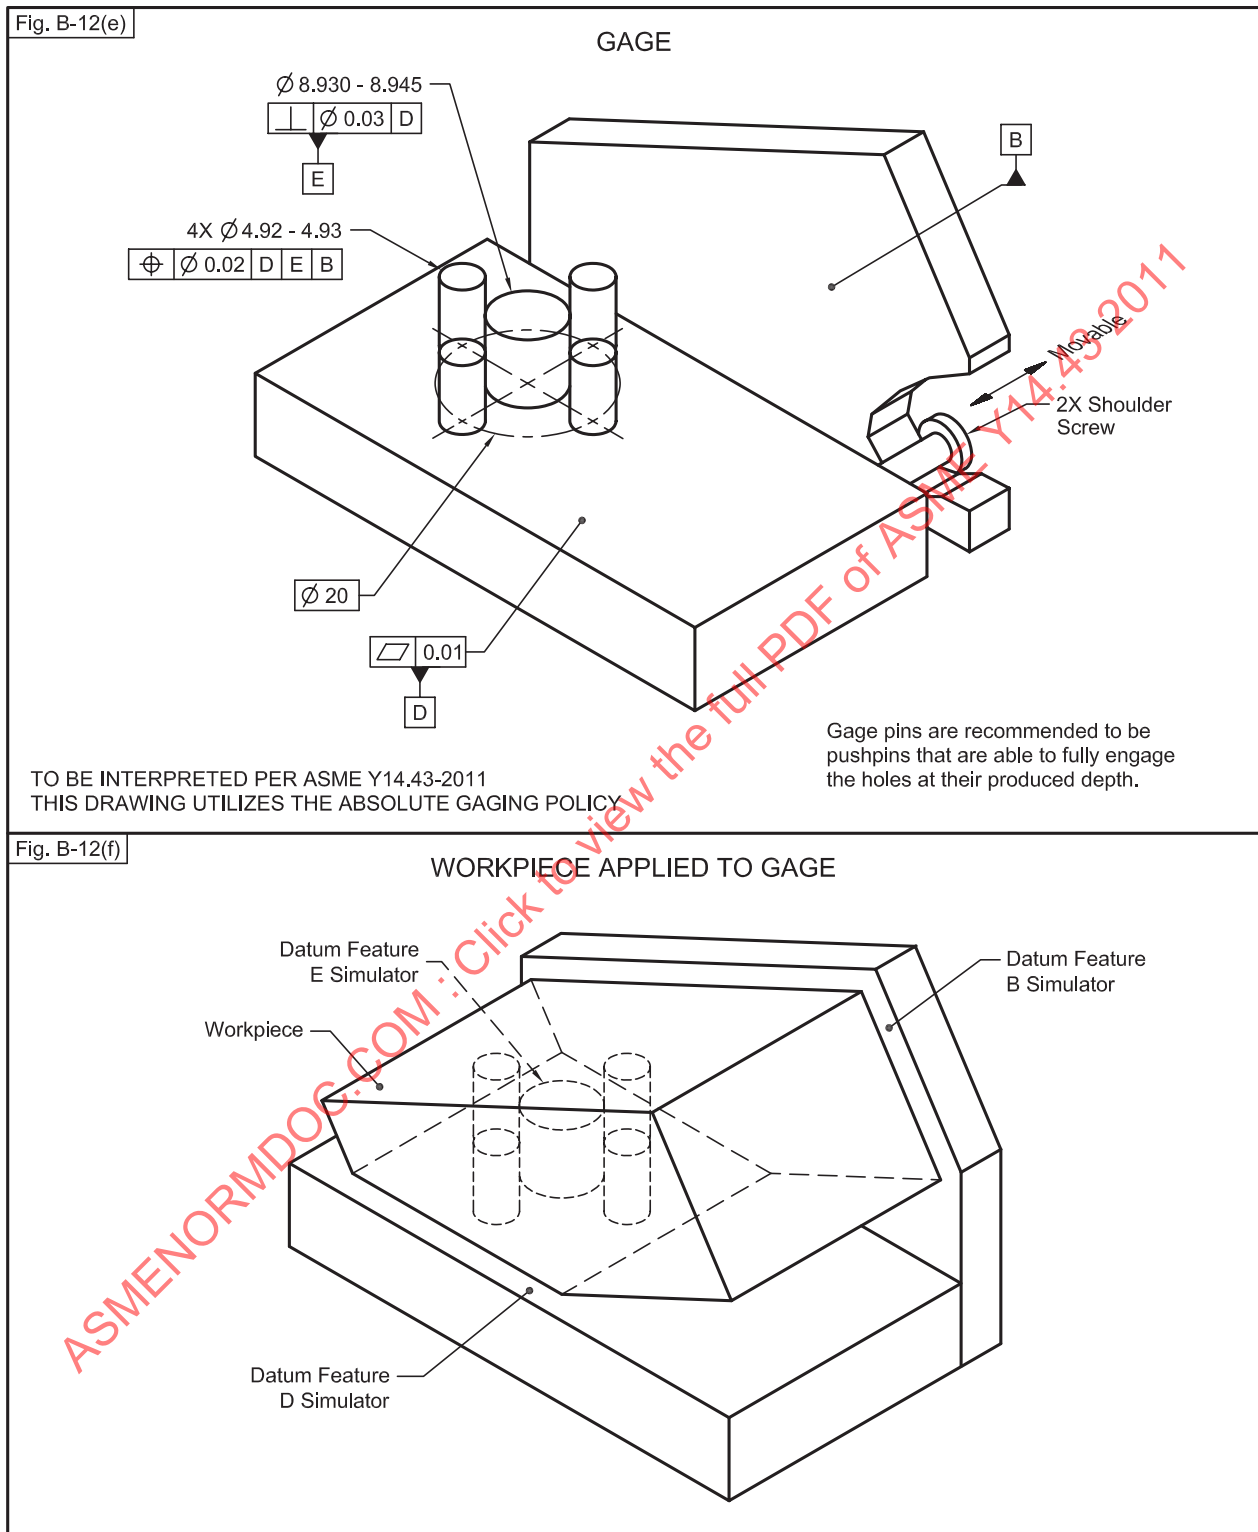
Interrelated Datum Reference Frames (Cont'd)
